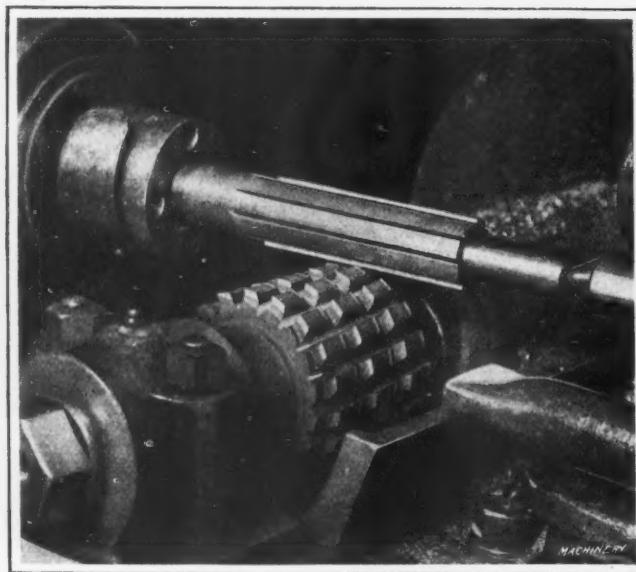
Hobbing Machine employed in cutting Splines in Shafts and Stem Gears
